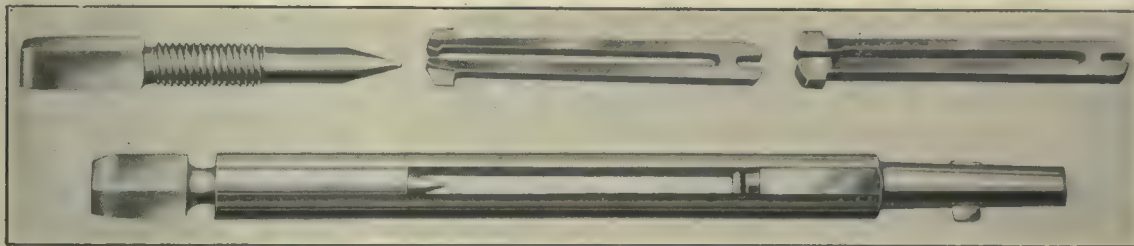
PARTS OF SLOTTING TOOL AND HEAD
